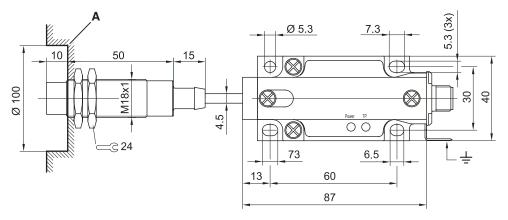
Dimensions for BIS L-409-045-002-07-S4 processor [mm]
